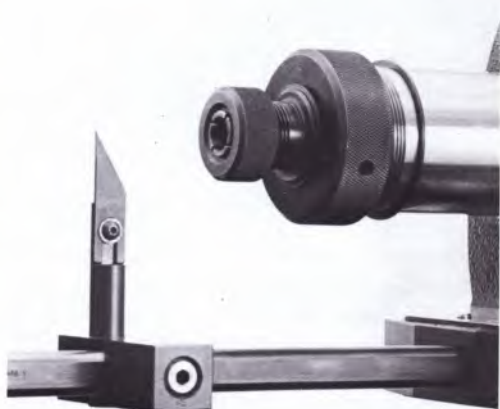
C-4 Collet, Nut and Adapter on Spindle
